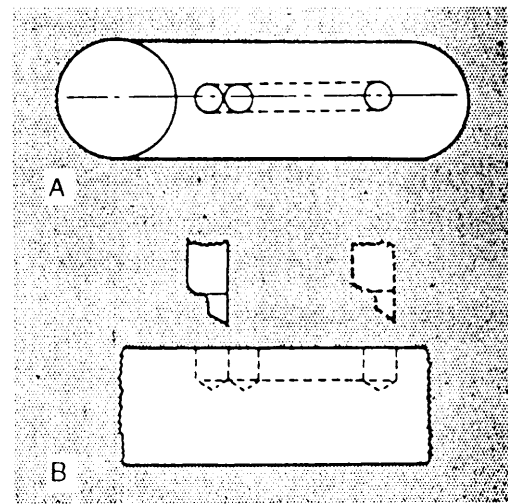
Cutting a keyway in the middle of a shaft.
